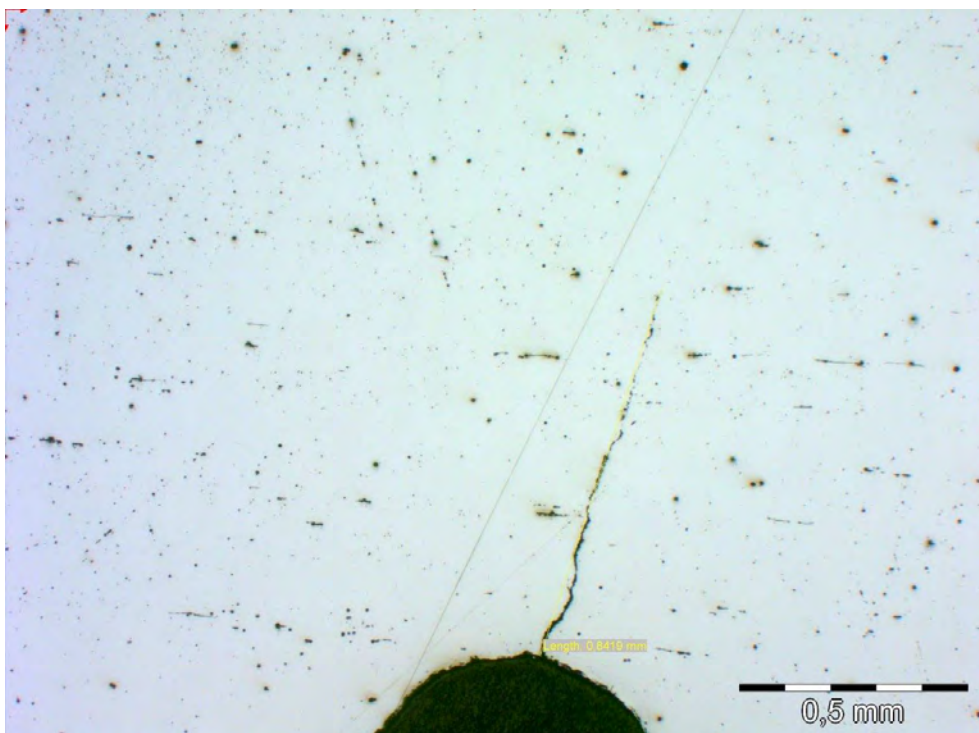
Cut three in crack at segment C, second ridge on barrel no. 14389
